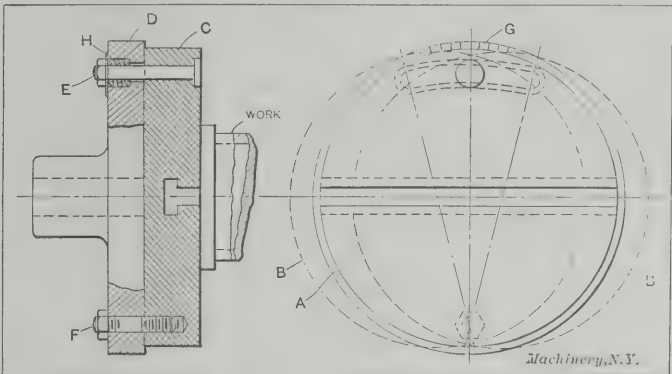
Special Lathe Face-plate for Turning Eccentric Rings, etc.
